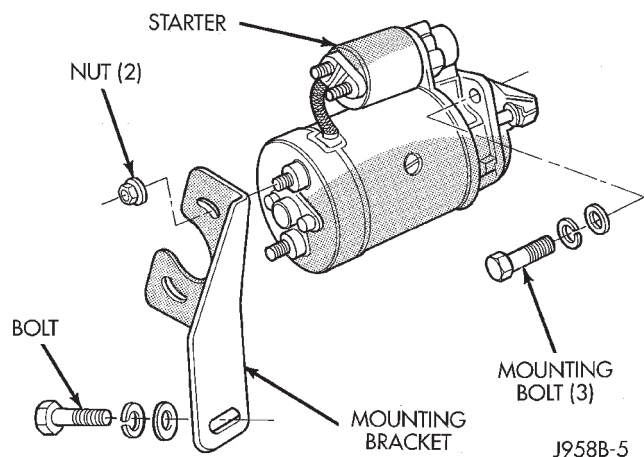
Starter Mounting - 2.5L Diesel Engine
